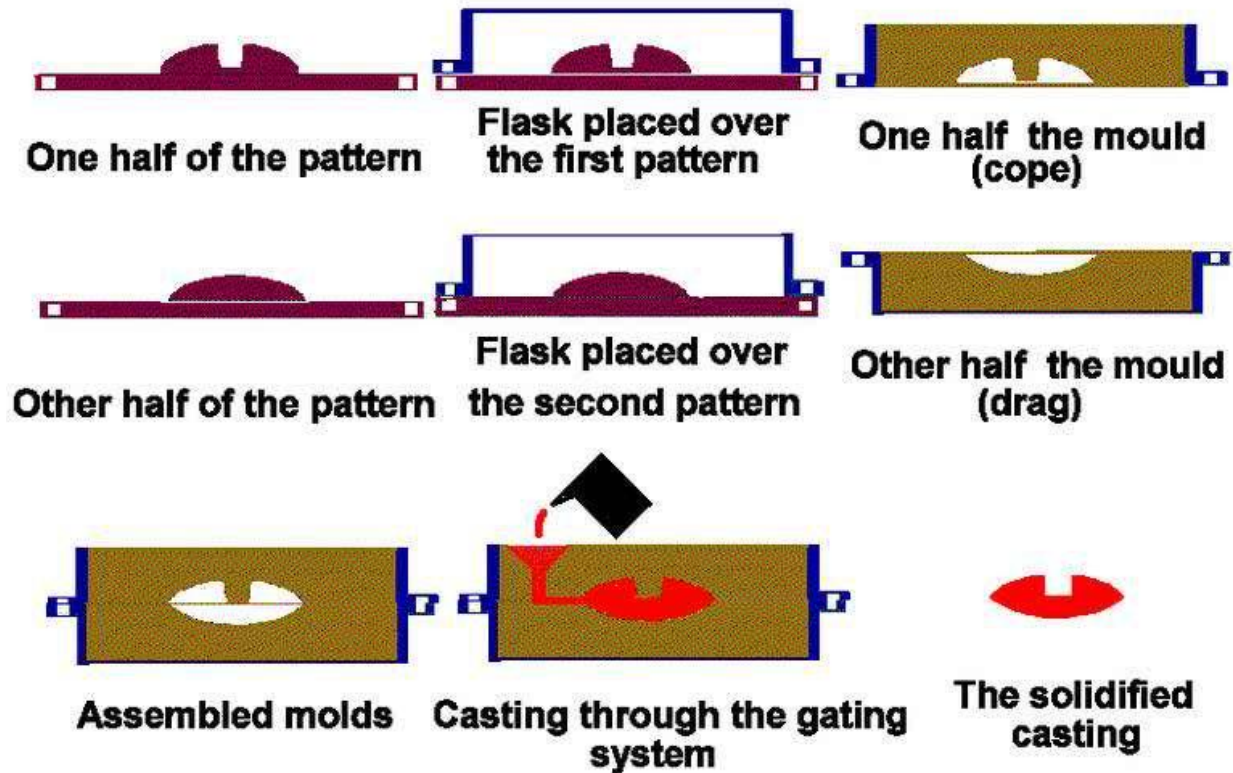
A METAL CASTING POURED IN SAND MOLD
